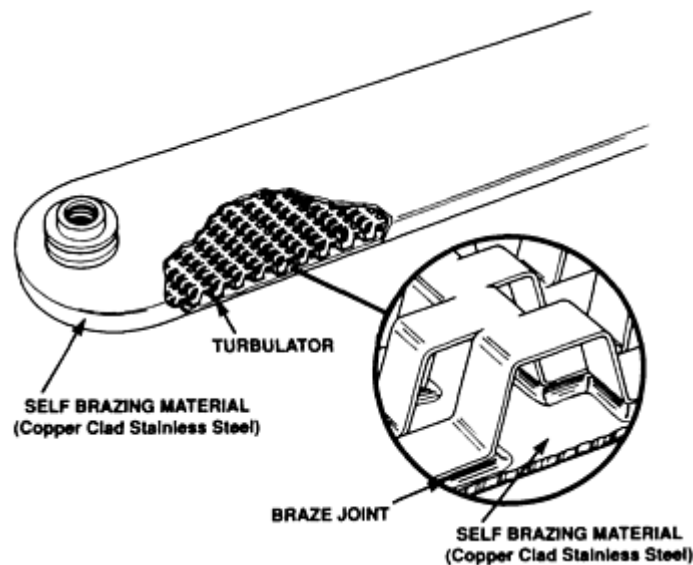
HEAT EXCHANGER FABRICATED USING CLAD BRAZING ("SELF-BRAZING") MATERIALS
